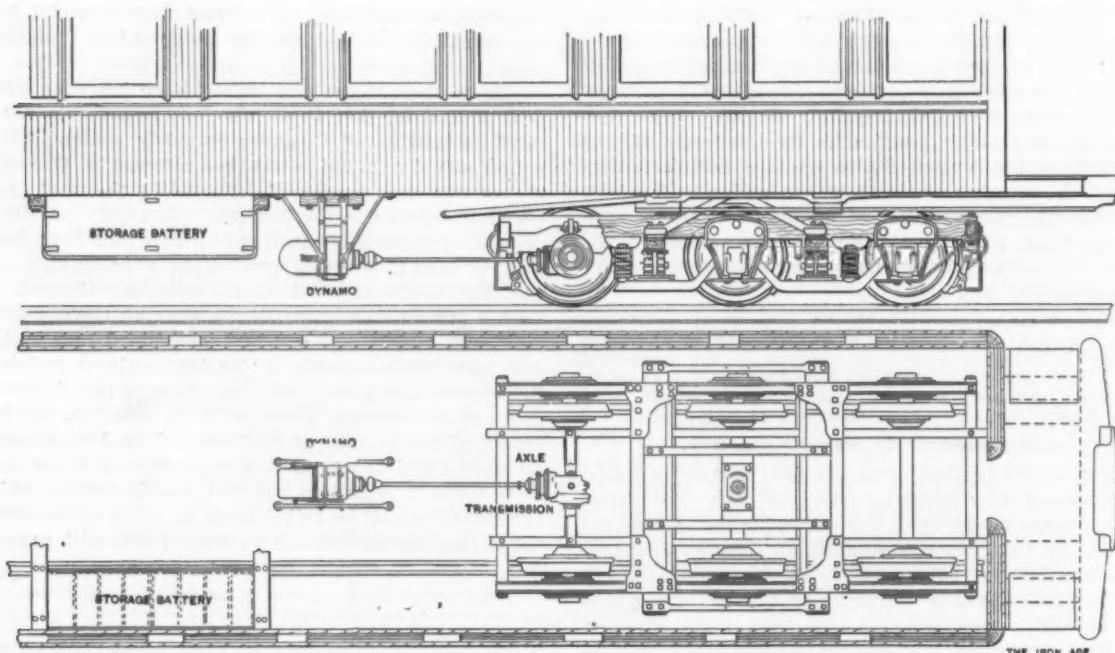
Side Elevation and Underneath View of a Car, Showing the Parts of the Deutsch Train Lighting System.
